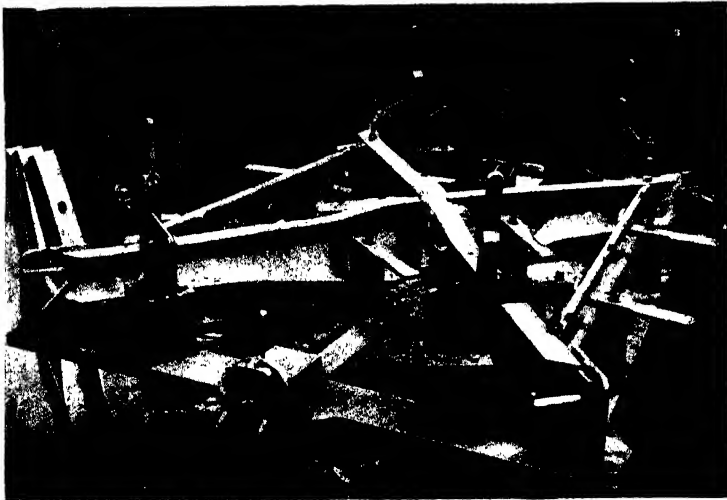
A CRUCIFORM ASSEMBLY JIG
